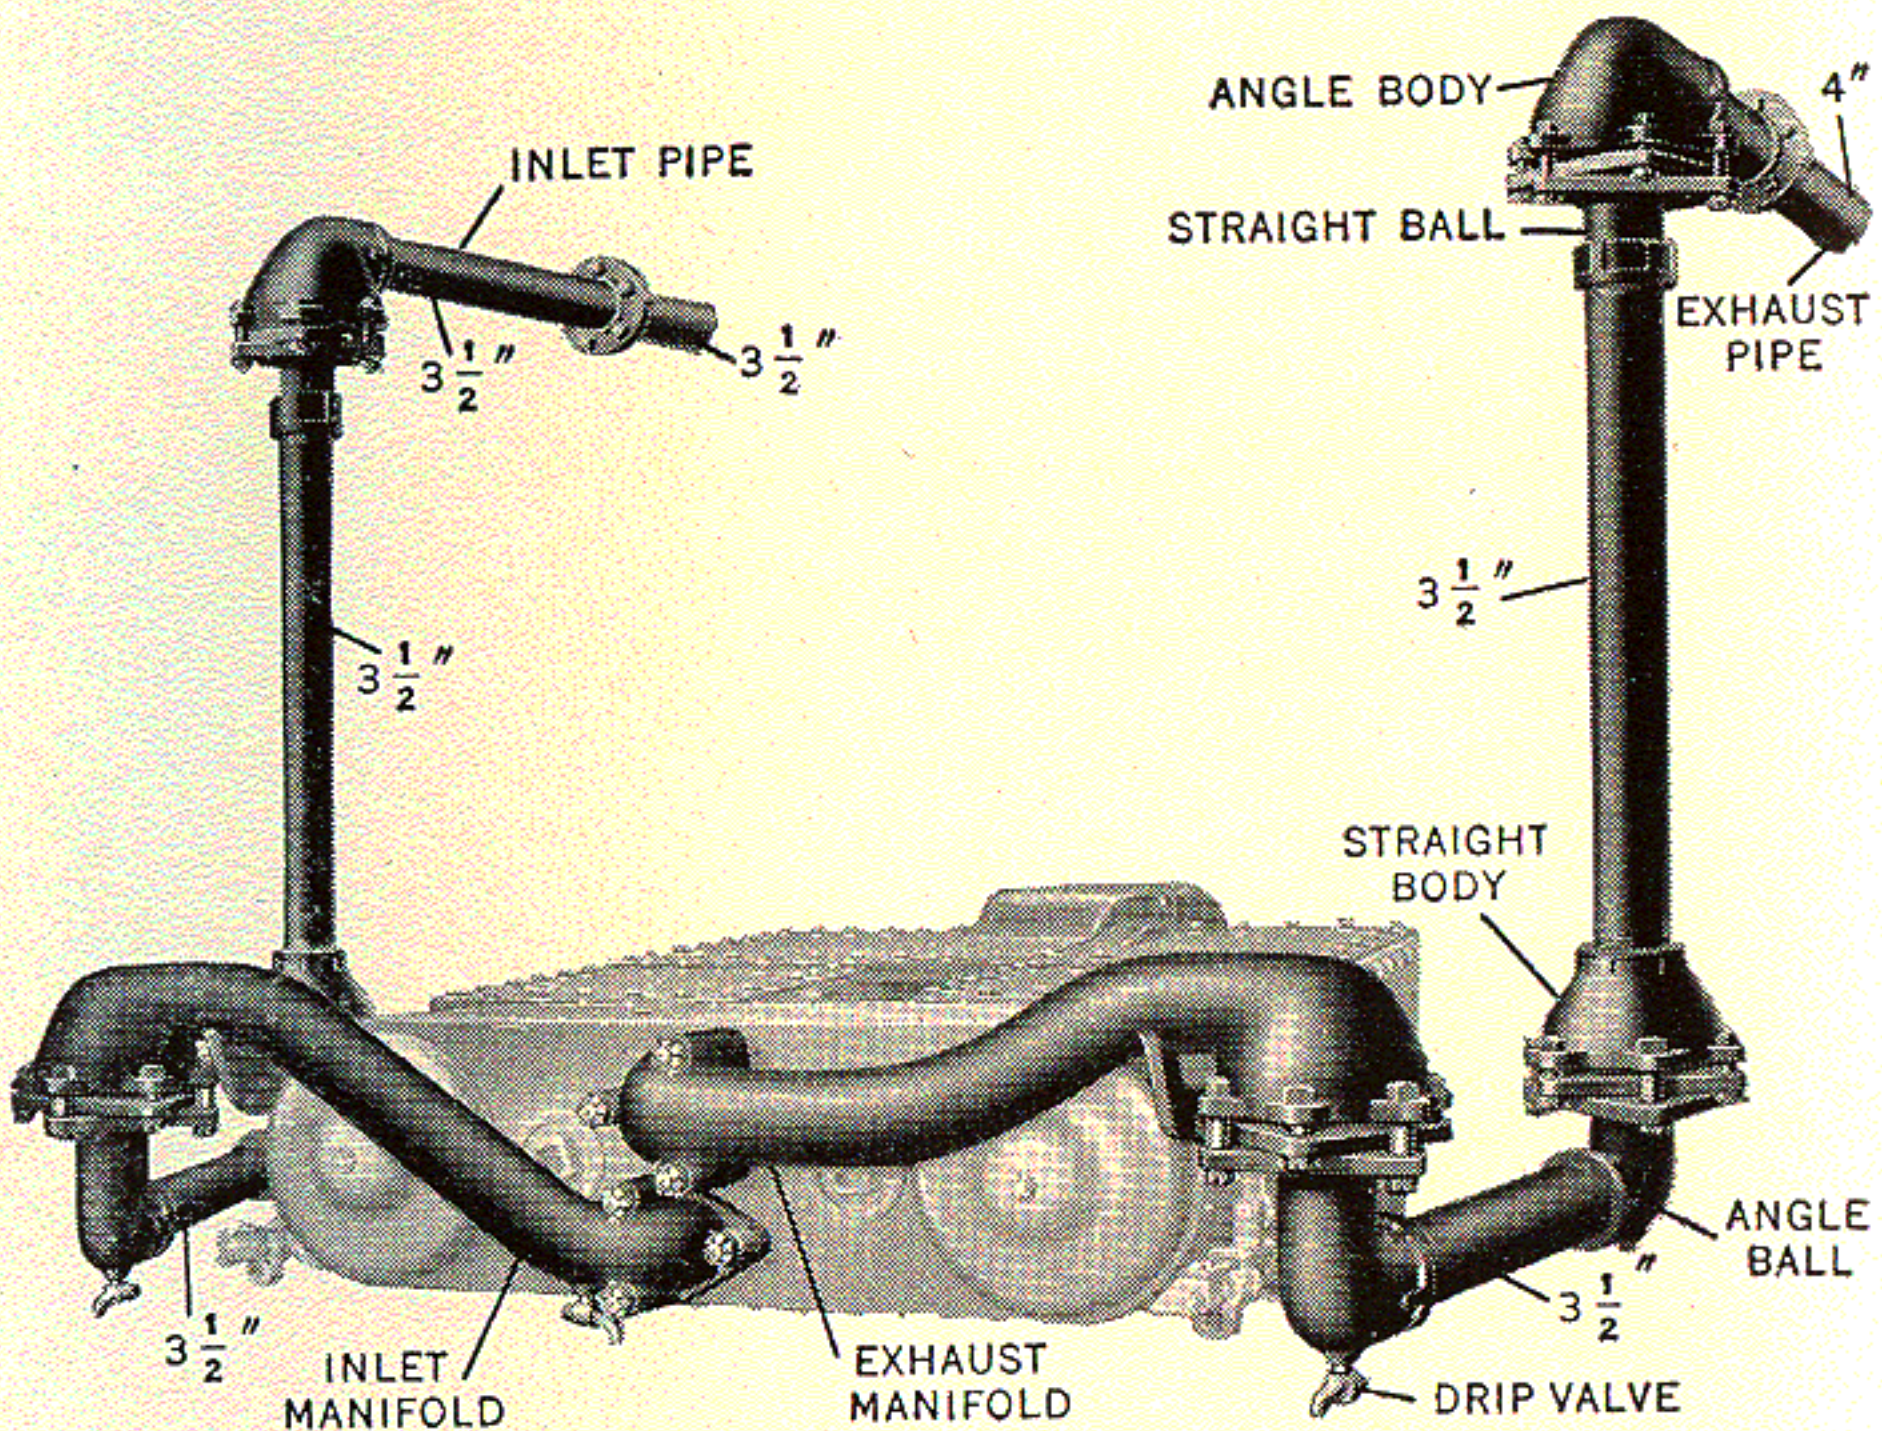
Type C-2 Booster Steam Inlet and Exhaust Joints, Manifolds and Piping
